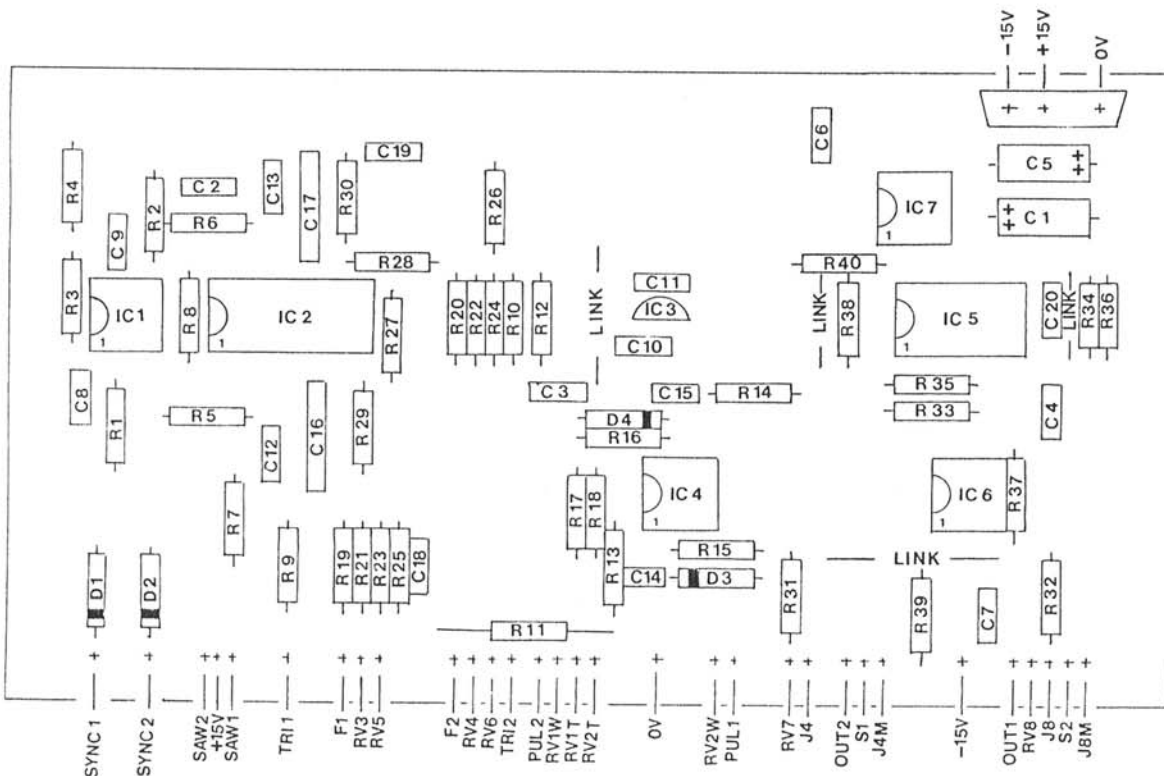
80-19 PCB COMPONENT LAY-OUT
